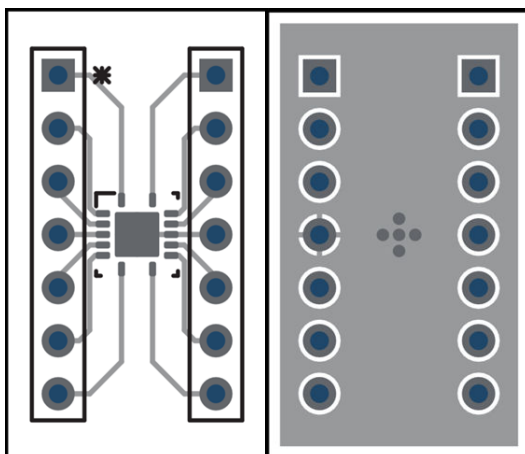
RUC package top layer (left) and bottom layer (right) PCB layout
